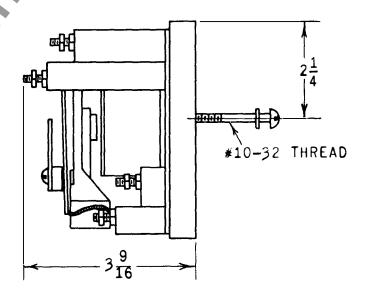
Outline Dimensions for Type HGAIIH Relay.
